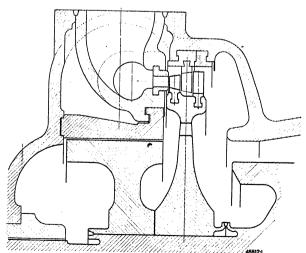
Method of securing impulse wheel and balancing piston by safety welding.
